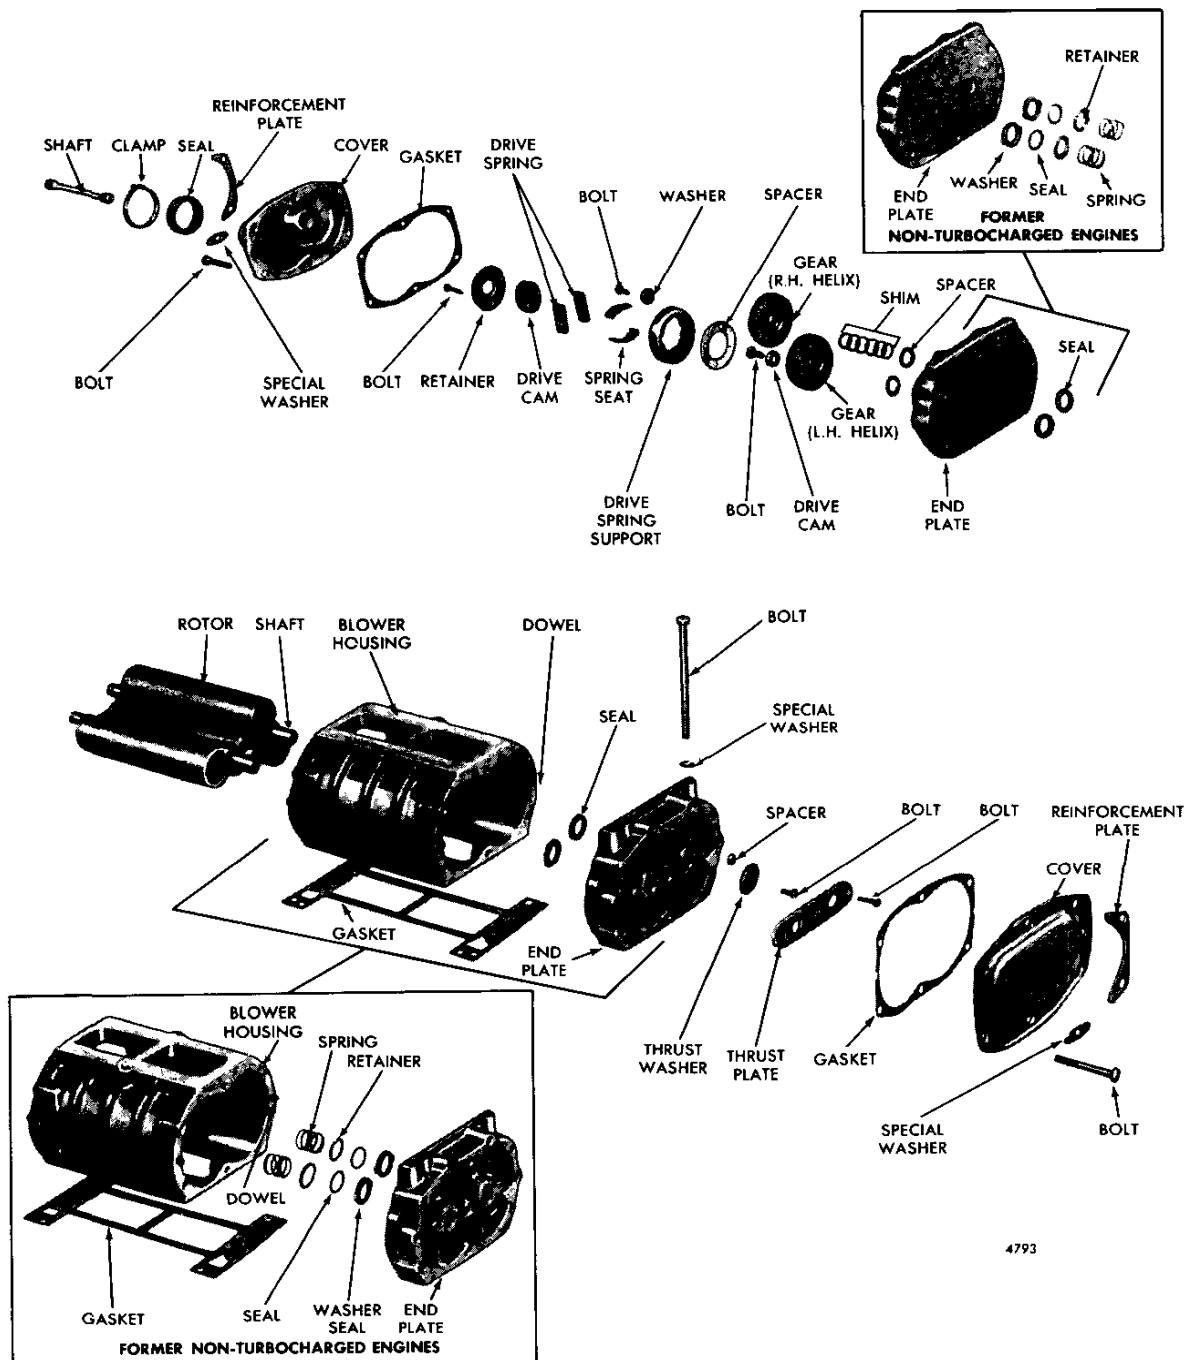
Typical Blower Details and Relative Location of Parts (4-53 Engine Blower)
